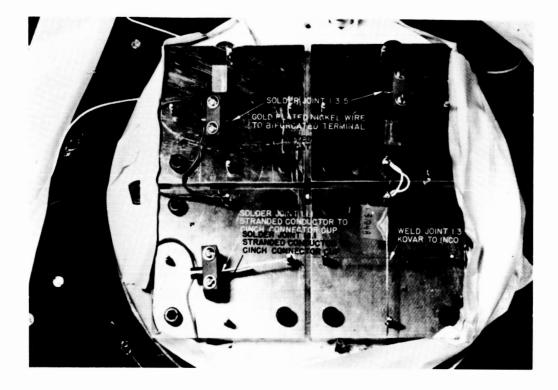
One weld joint and three solder joints mounted on vibration table (R105474).
